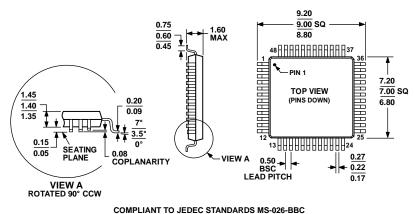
48-Lead Low Profile Quad Flat Package [LQFP] 7 mm × 7 mm Body (ST-48)
